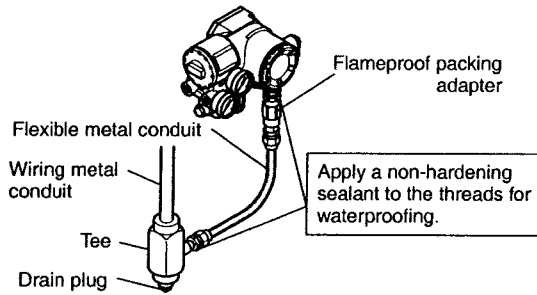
Typical Wiring Using Flexible Metal Conduit
